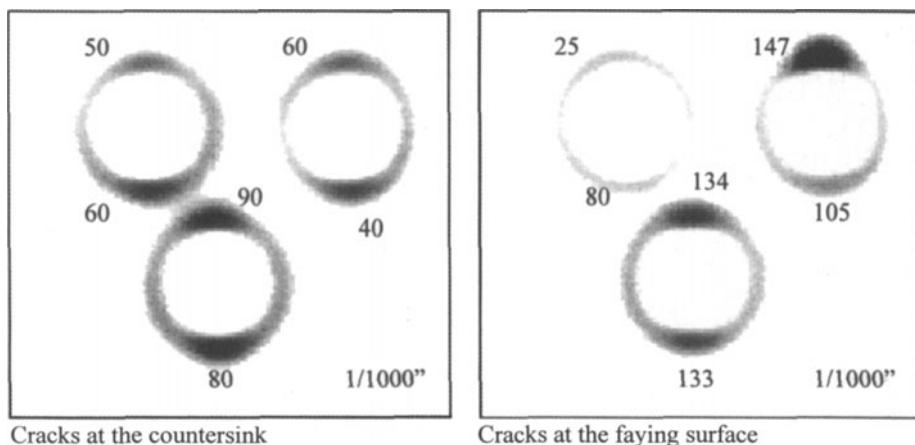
1 kHz-2 kHz mixed frequency scans of specimens with cracks under fasteners
